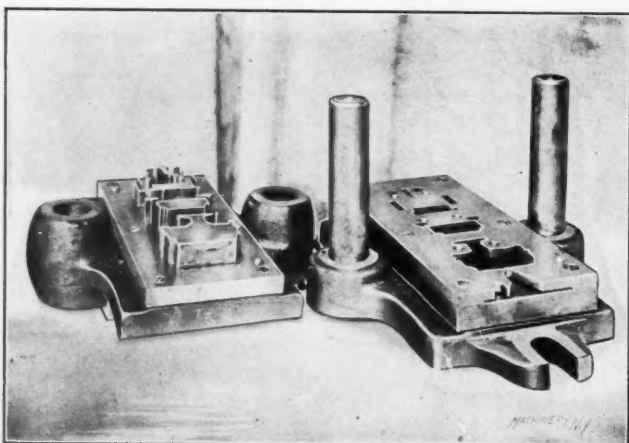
Punch and Die for Blanking out the Adding Machine Ribbon Fork
